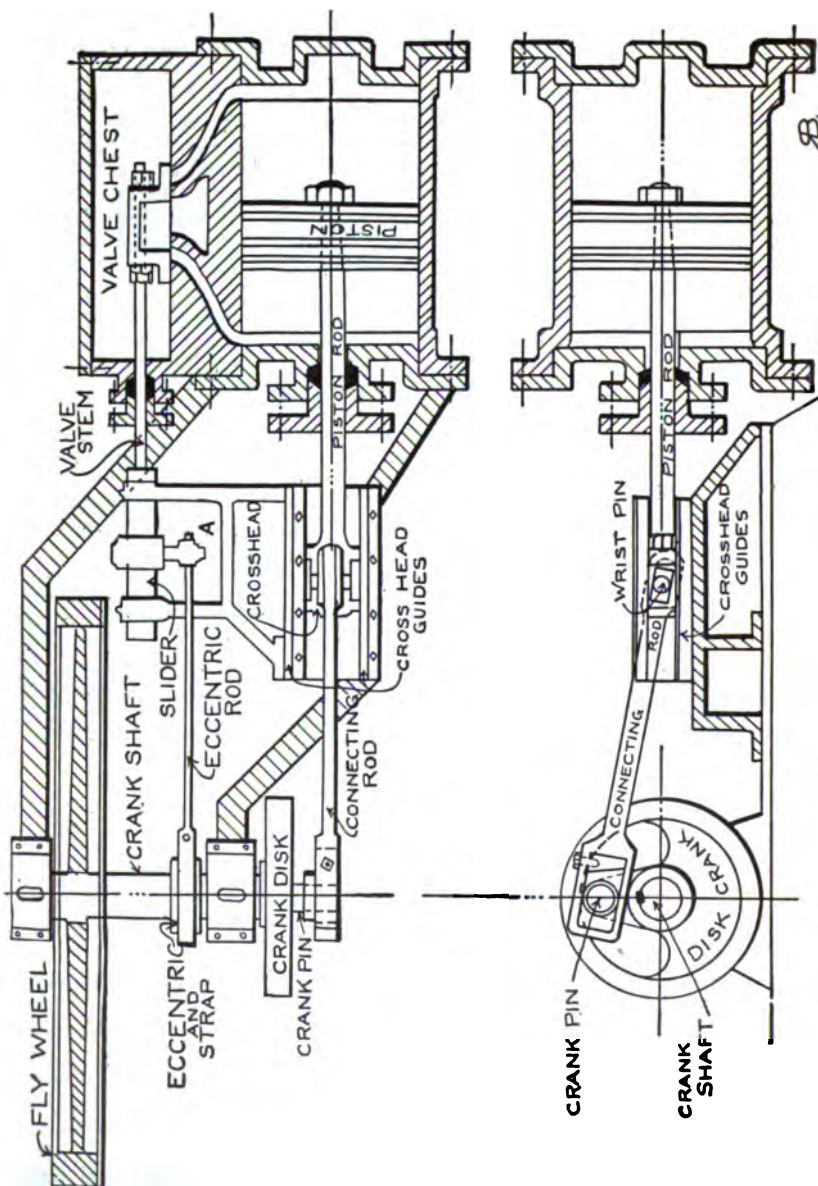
SEC. 3.—Valve gear of simple slide-valve engine.
